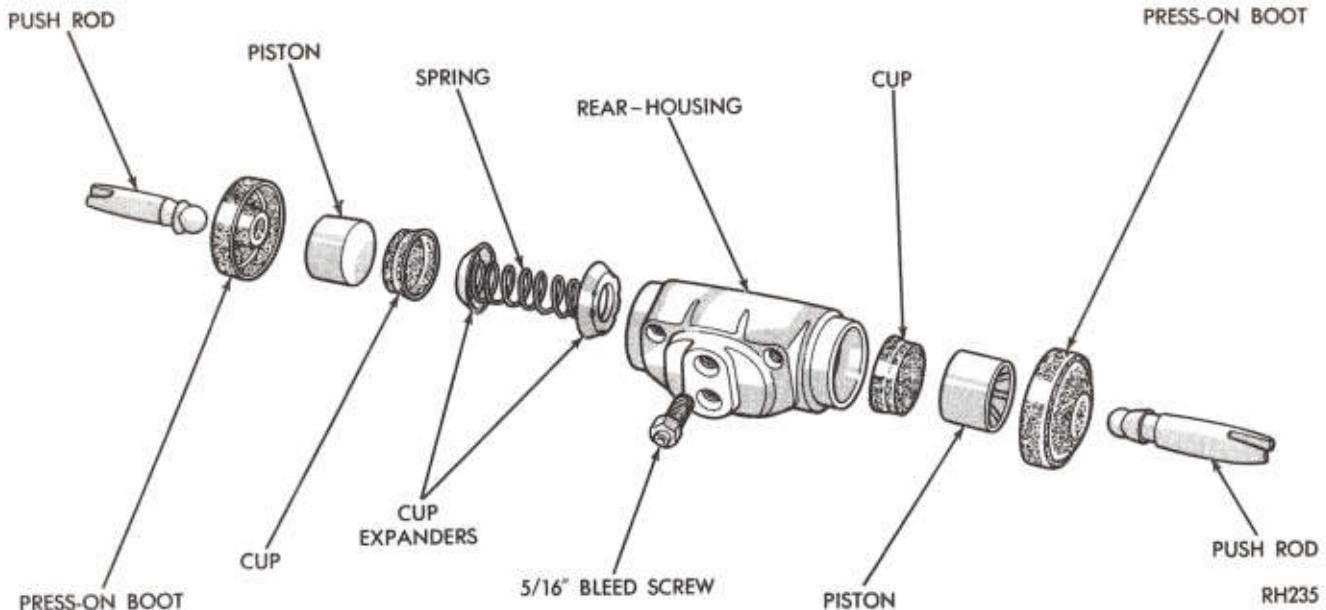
Rear Wheel Cylinder 11 and 12 Inch Brakes
